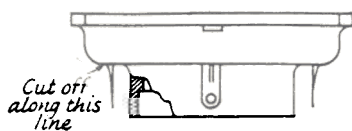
Sketch showing how the lower portion of the tube socket is cut off.
